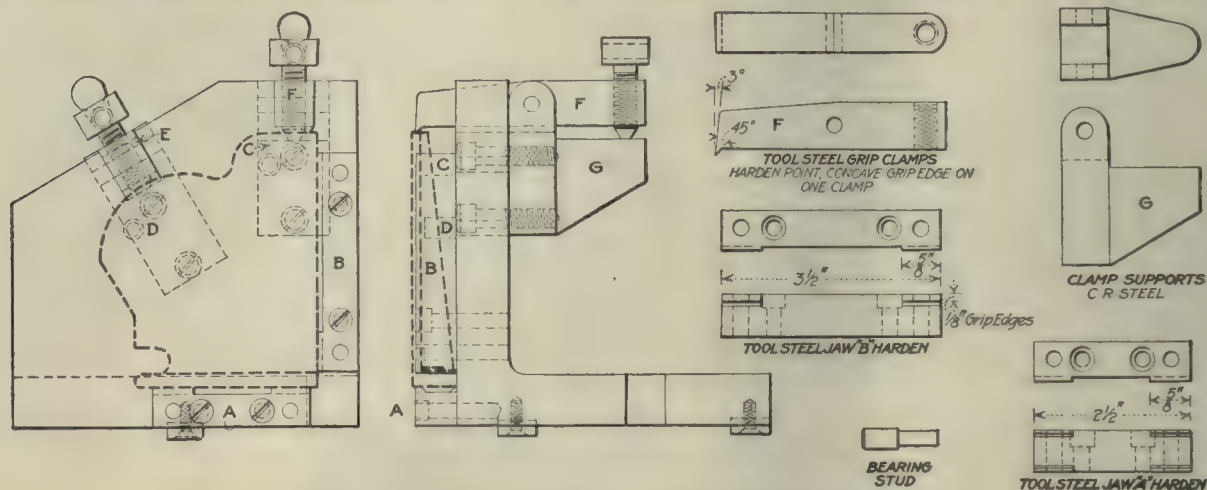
GRINDING FIXTURE FOR SIDE BRACKETS
